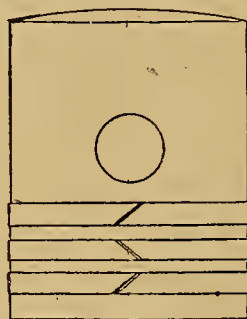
Piston used in the Talbot car, which captured the 100 miles in one hour record.
